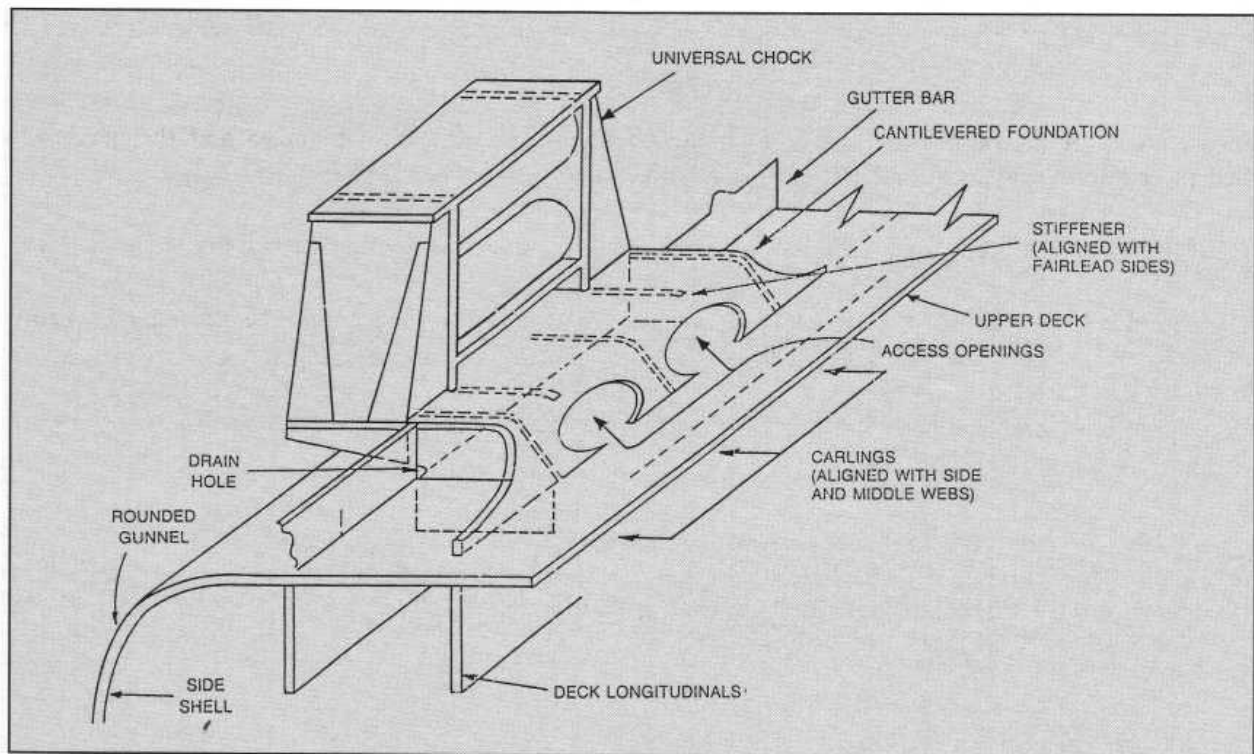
TYPICAL CANTILEVERED FOUNDATION IN WAY OF ROUNDED GUNNEL
